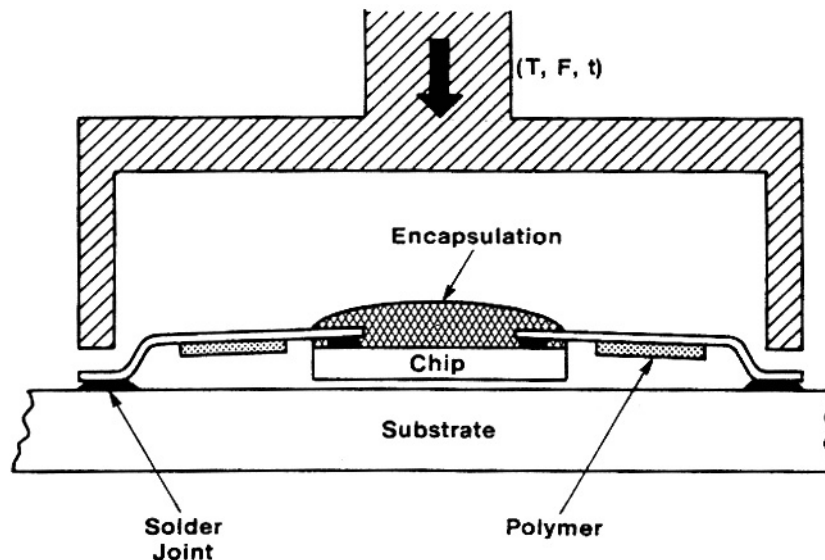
Outer Lead Bonding (OLB) by thermode soldering.
